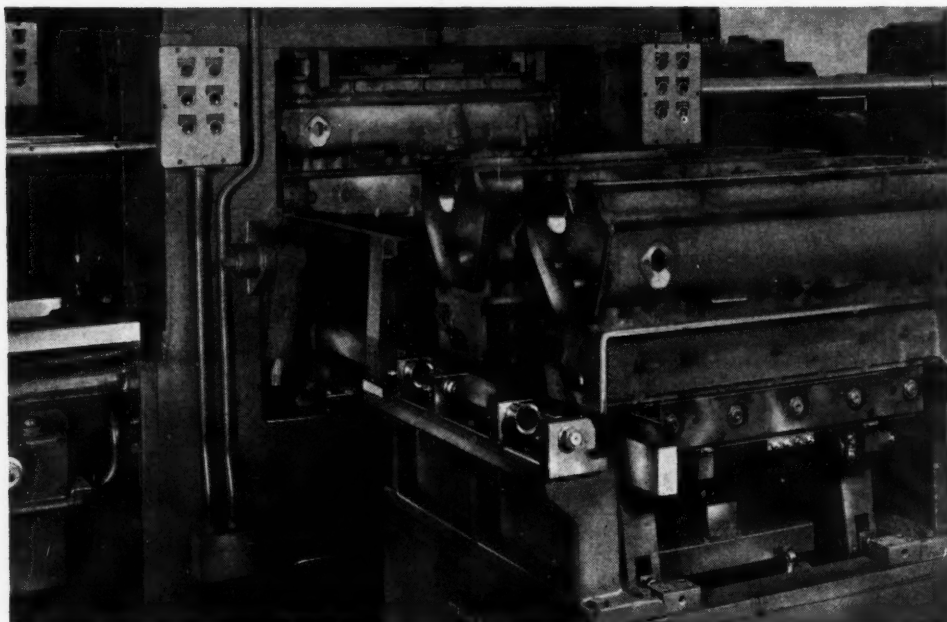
Close-up View of the Loading Station on Machine Shown in Fig. 1. The Two Engine Blocks are Raised into the Operating Position and Clamped on Their Pan Rails at the First Machining Station, Shown in Back of the Loading Station
